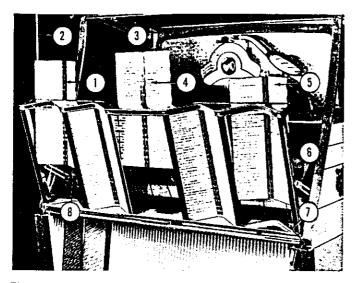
PROGRAM HOLDER ASSEMBLY 111909 1. Title Strip Holder and Decal Assembly, A1-D0, Vee 111576 2. Fall Support, Dome 111180 3. Knurled Thumb Screws, 10-32 30940, 8-32 69710 Title Strip Holder and Decal Assembly, J1-M0, Flat 4. 111575 5. Title Strip Holder and Decal Assembly, S1-V0, Vee 111579 Title Strip Holder and Decal Assembly, N1-R0, Vee 111578 Title Strip Holder and Decal Assembly, E1-H0, Vee 111577 6. Fall Support R.H. 69005. L.H. 69006 7. Hinge R.H. 69042, L.H. 69041 8. Electric Counter and Free-play Switch Assembly 111918
